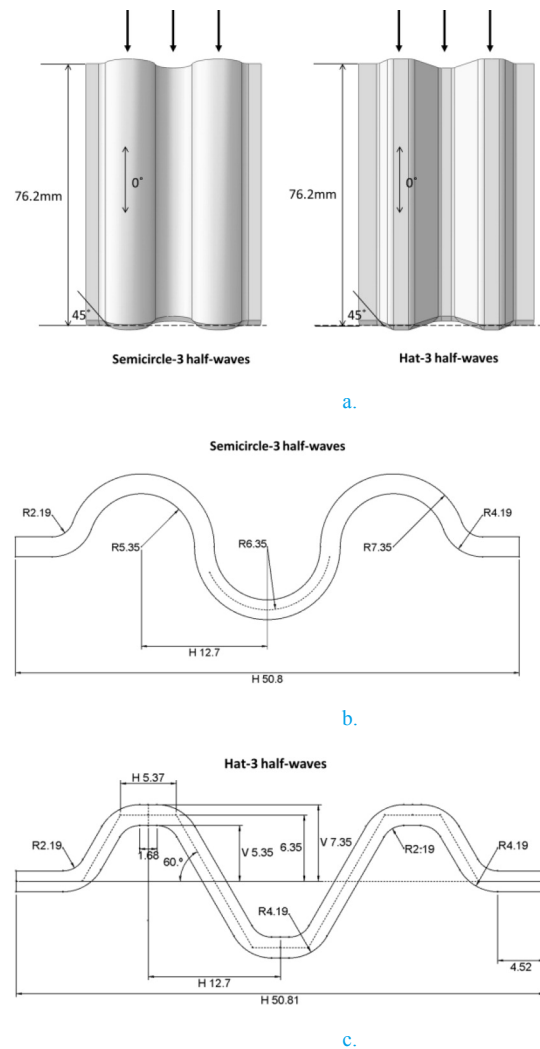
Specimen geometries (a) chamfer and loading direction and (b) cross-section dimensions (mm).
